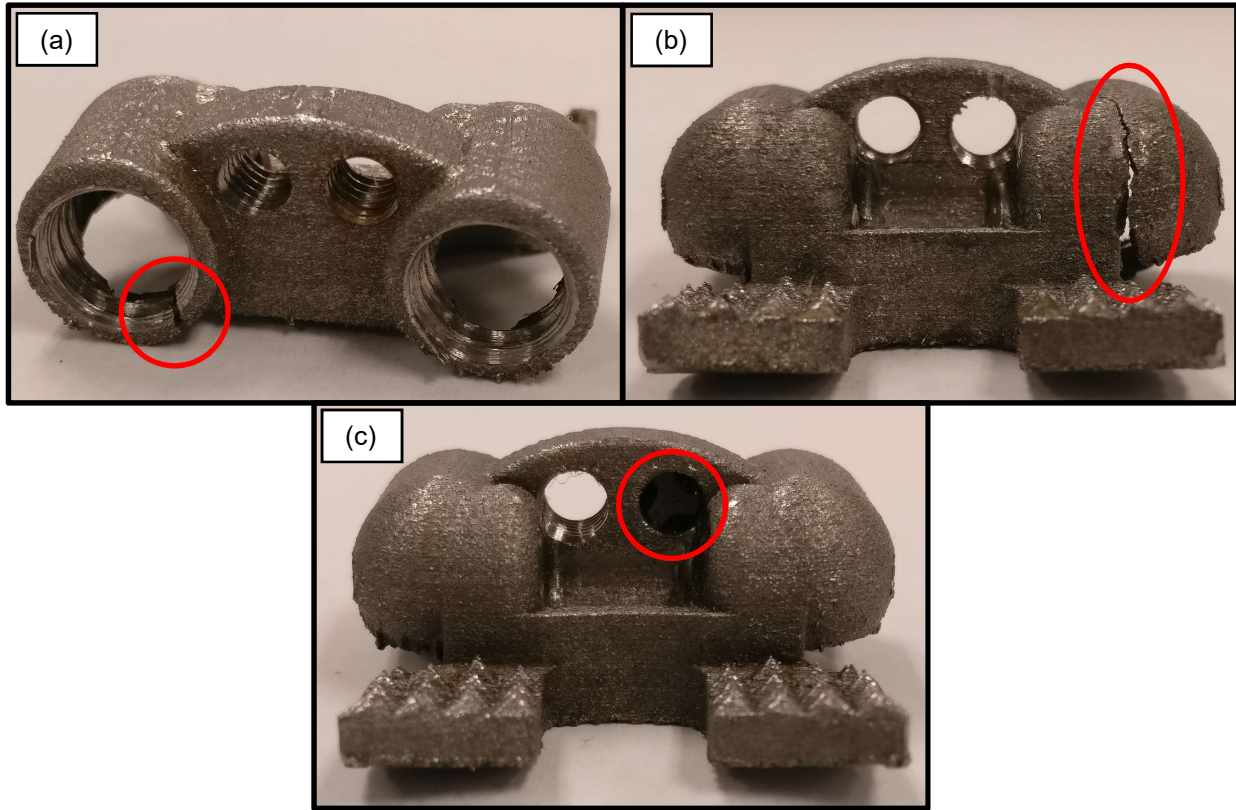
Examples of 3D printed titanium alloy prototypes that failed during post-processing: a) crack through wall during M8 thread tapping, b) crack in socket while locking polyaxial rod and c) M4 tap broken while tapping thread for jaw locking screw
